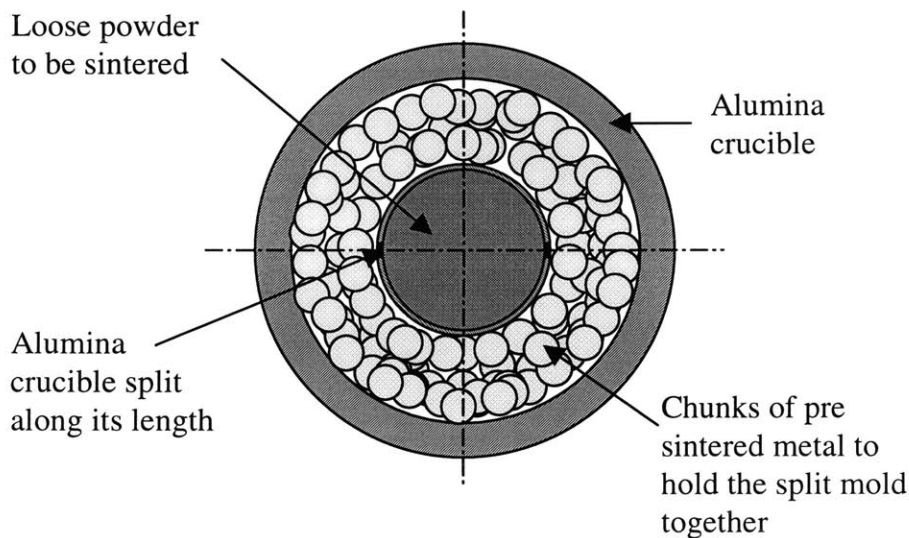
Illustration of the split mold concept: pre sintered metal chunks on the outside hold the two halves of the mold together.
